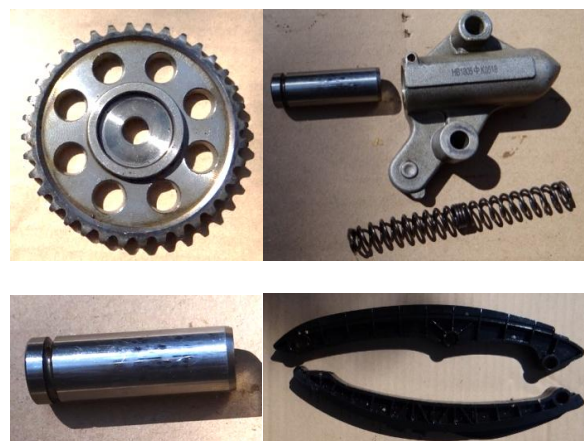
Components of the engine timing drive mechanism: timing sprocket, chain tensioner (visible scuff marks on the tensioner piston surface), chain tensioner piston (signs of frictional wear), and timing chain guides
